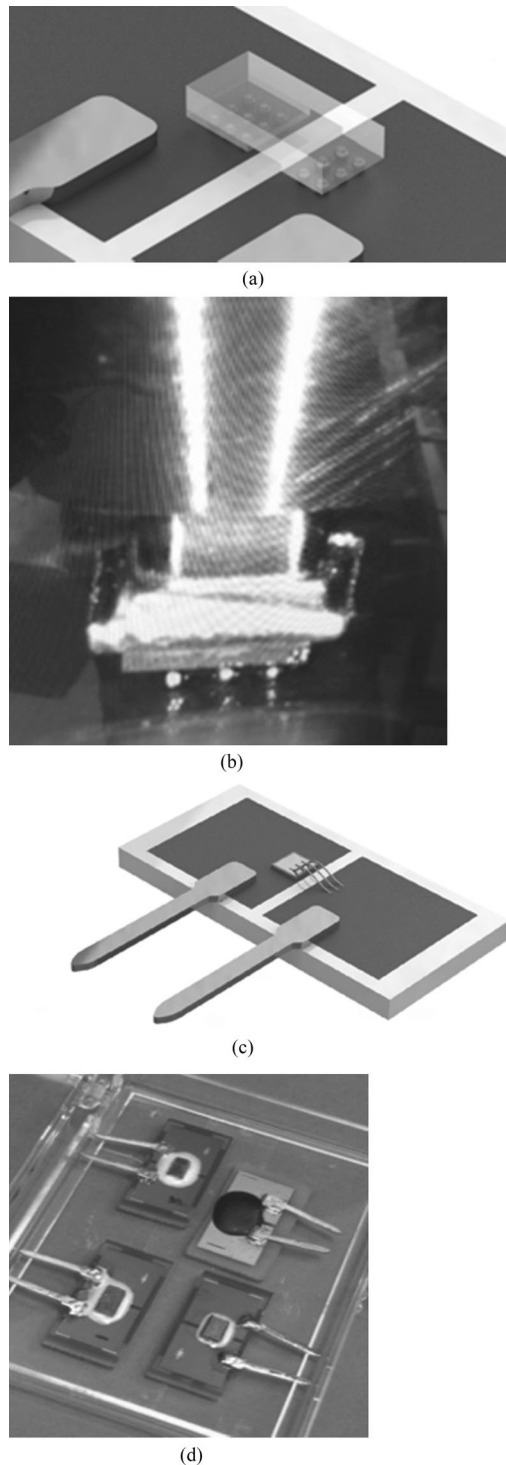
(a) CAD rendering of the wire bondless flip-chip SBD package, (b) a magnified image of the solder spheres collapsing while reflowing, (c) a CAD rendering of the wire-bonded SBD module, and (d) a photograph showing the finished wire bondless and wire-bonded TO-247 type packages.
